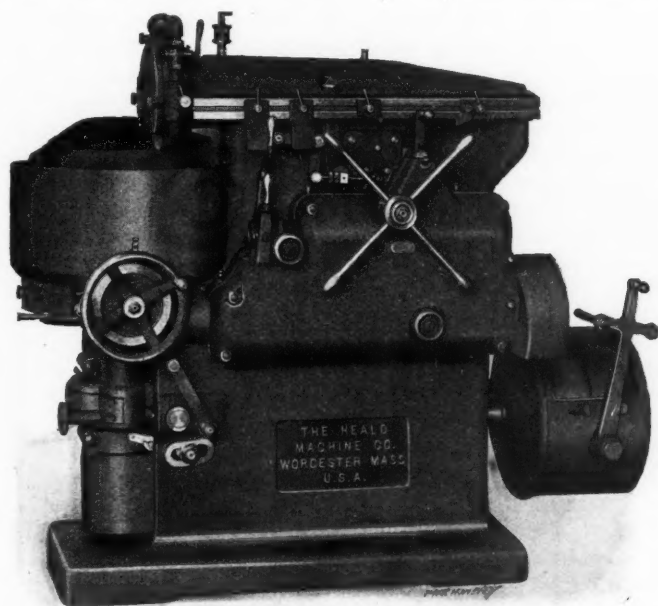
Heald 12-inch Rotary Surface Grinding Machine
